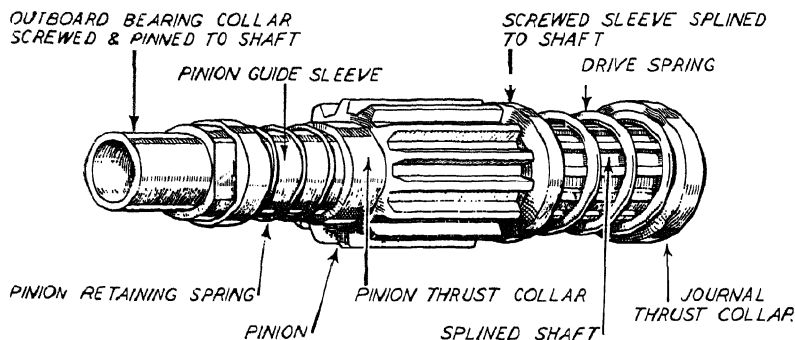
COMPRESSION DRIVE WITH PINION GUIDE AND RETAINING SPRING (OUTBOARD PATTERN)
